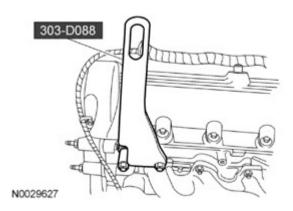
Installing Engine Lifting Bracket Set Courtesy of FORD MOTOR CO.
